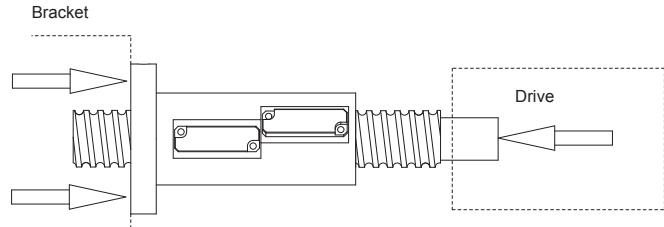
Recommend mounting direction of heavy load ballscrew
